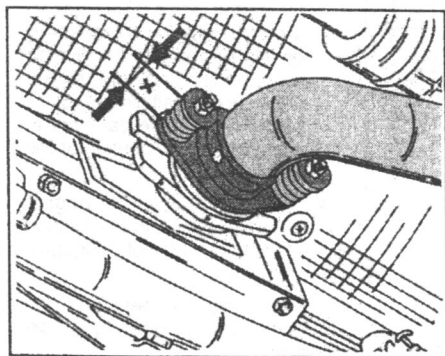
The two nuts must be tightened until dimension "X" is 22 mm on both sides of the pipe.
